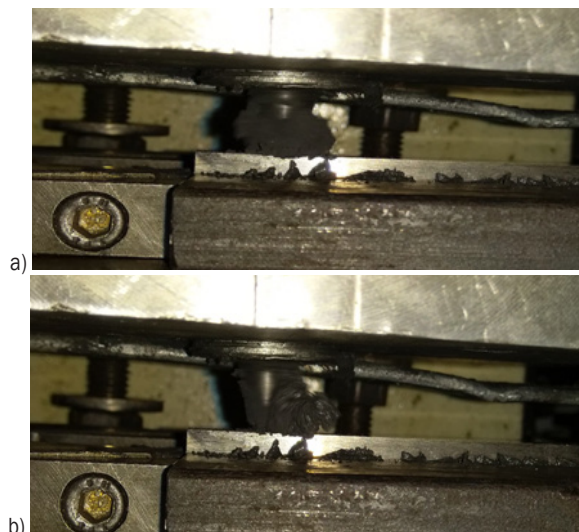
Mechanism of material removal in BEMRF process; a) ball is formed at finishing tool with pulse DC power supply (TON condition), b) ball is formed at finishing tool with pulse DC power supply (TOFF condition)
